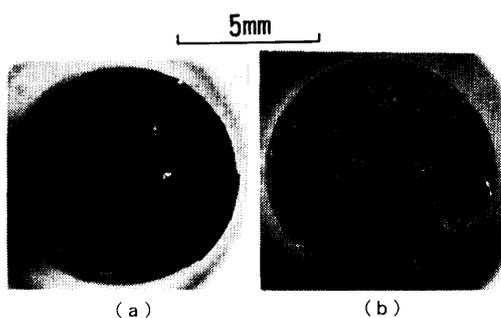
Macroscopic observation of fracture surface for specimens with preflawed (a) PVD and (b) CVD coating films under corrosion fatigue test ($\sigma_a = 150$ MPa)
